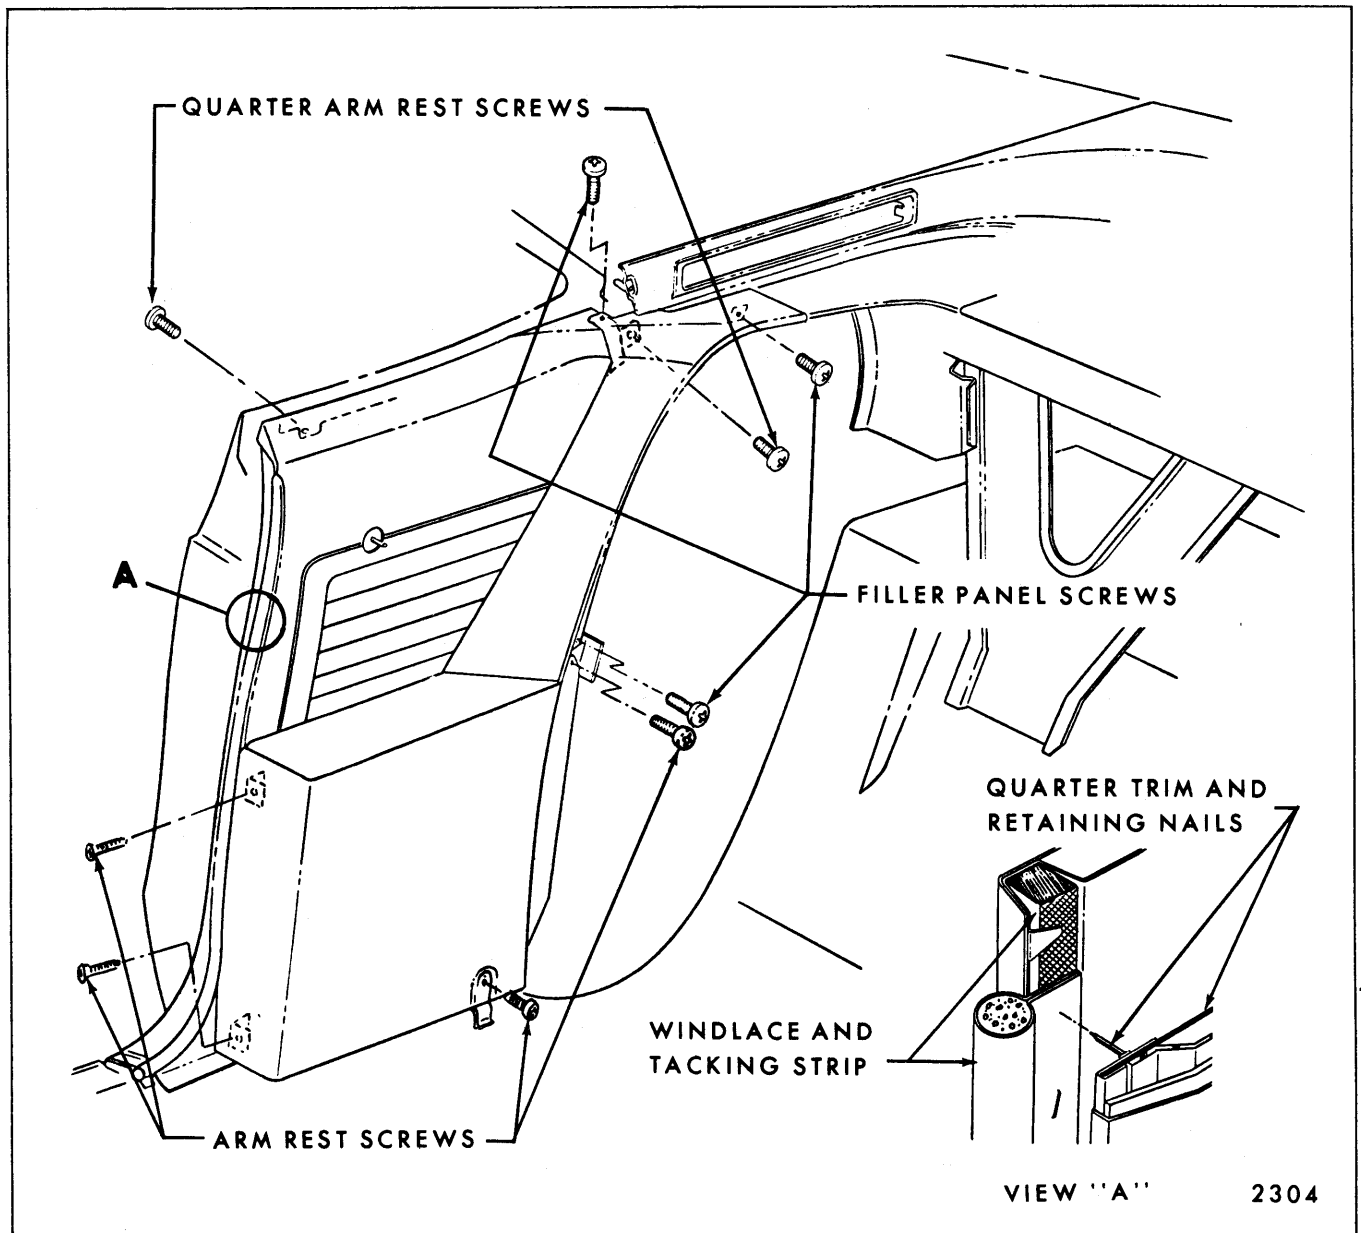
Rear Quarter Trim Assembly - "39487" Style
